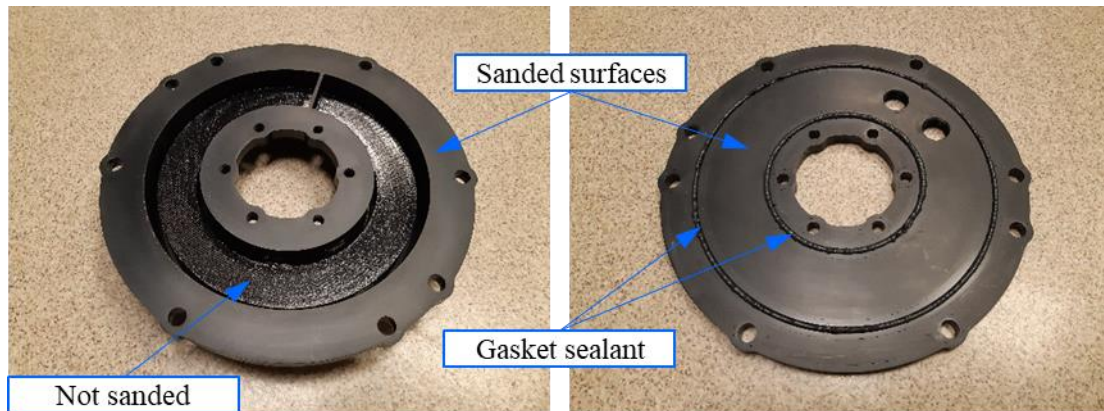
Bottom (left) and top (right) parts of the end-winding channel after sealing with epoxy and sanding surface finish.
